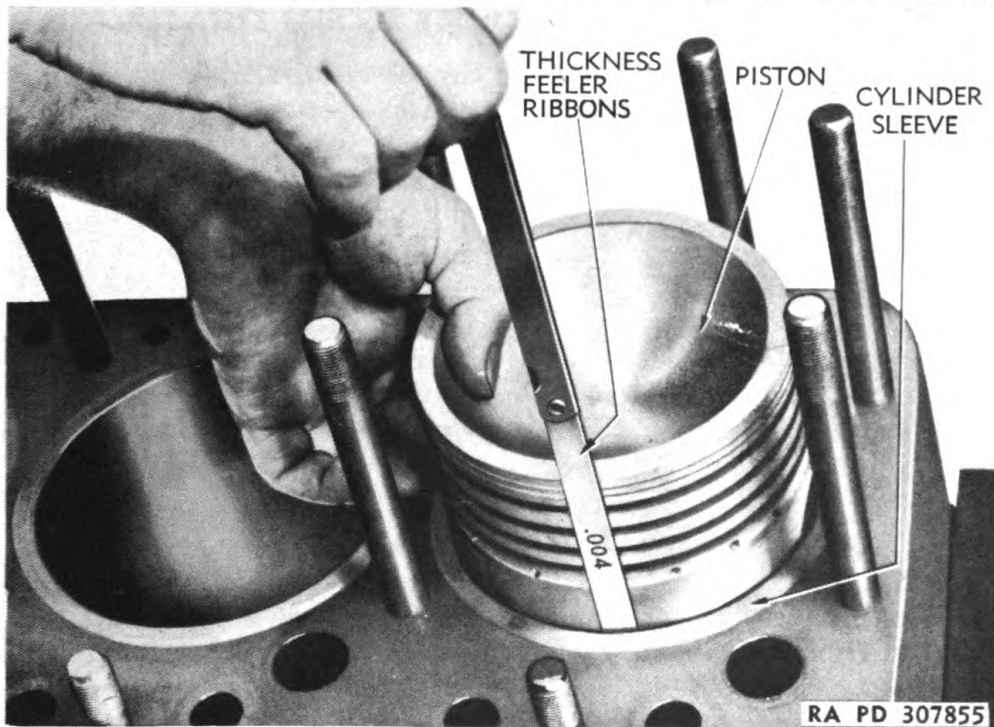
Measuring Clearance Between Piston and Cylinder Sleeve, Using Gage 41-G-400
